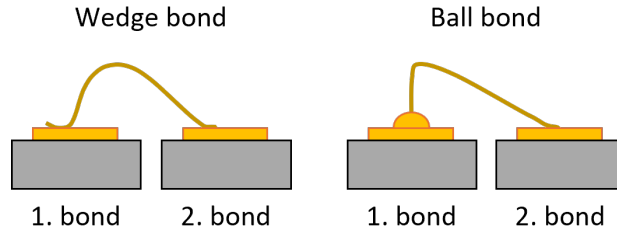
Types of wire-bonding. In a wedge bond, the wire is welded to the film on both ends. In a ball bond, one side is connected with a Au-ball instead.
